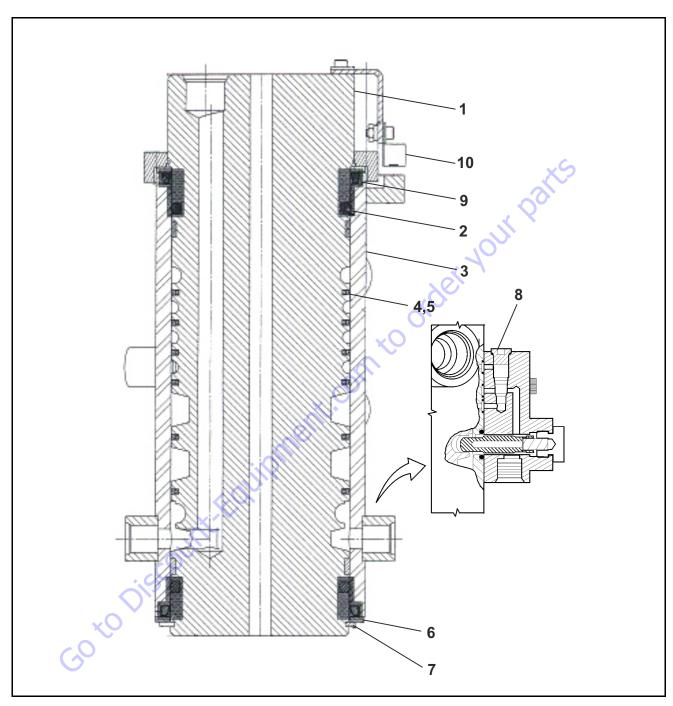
Rotary Coupling (USA Built Machines, SN 0300138729 through 0300171769 and China Built Machines, SN B300000100 through B300000969)
